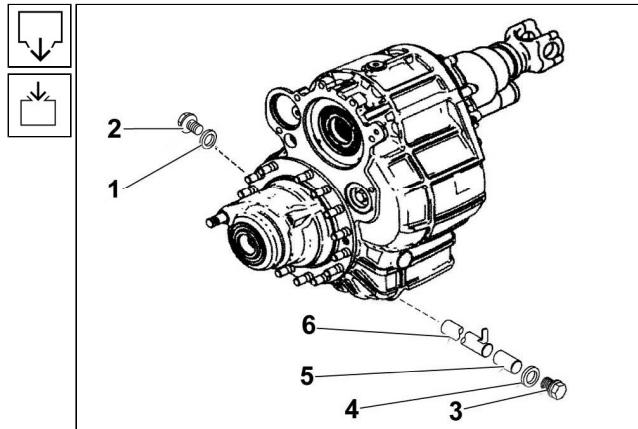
Oil drain and inspection plugs on the auxiliary gearbox
